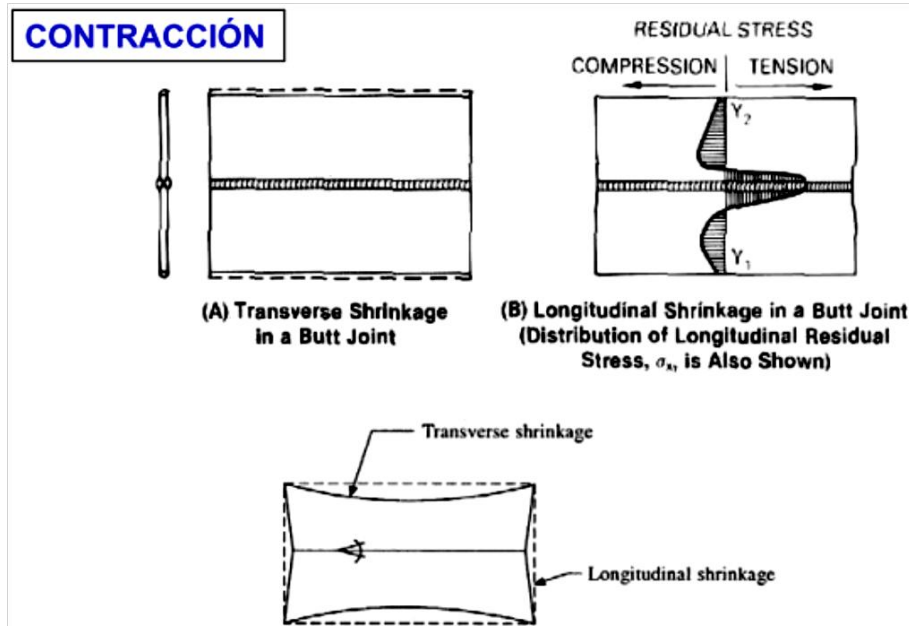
Transverse and longitudinal shrinkage of a butt welded panel
